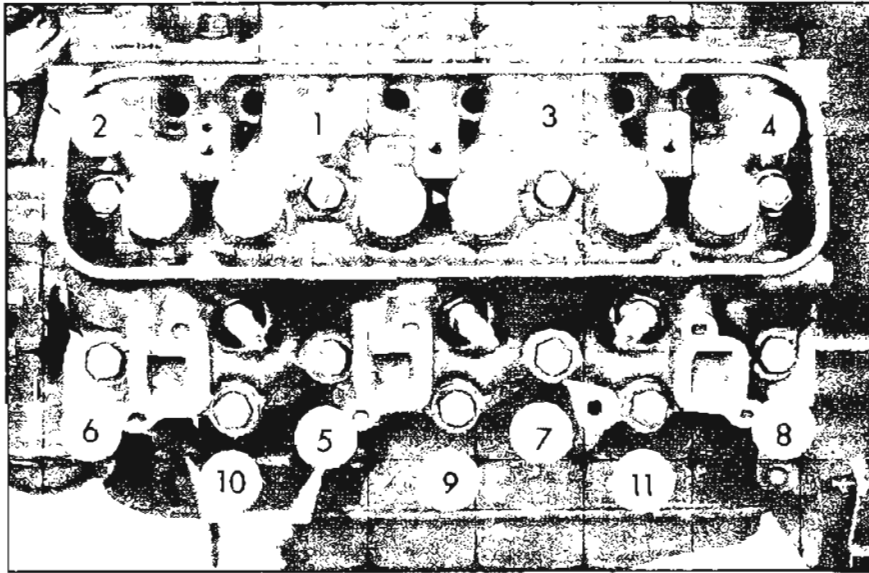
Cylinder Head Bolt Tightening Sequence
